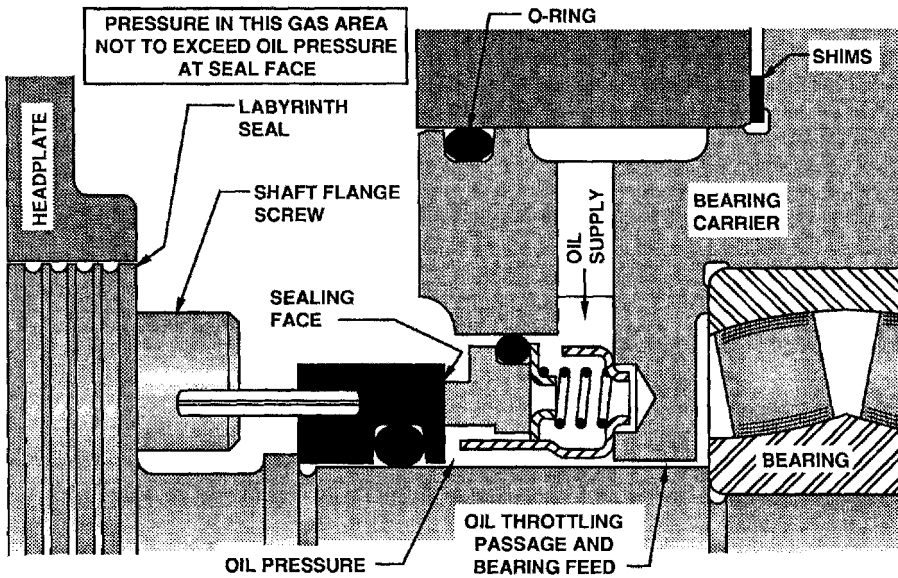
Mechanical seal installed on a modern lobe blower. (*Dresser Industries, Inc., Roots Division, Connersville, Ind.*)
